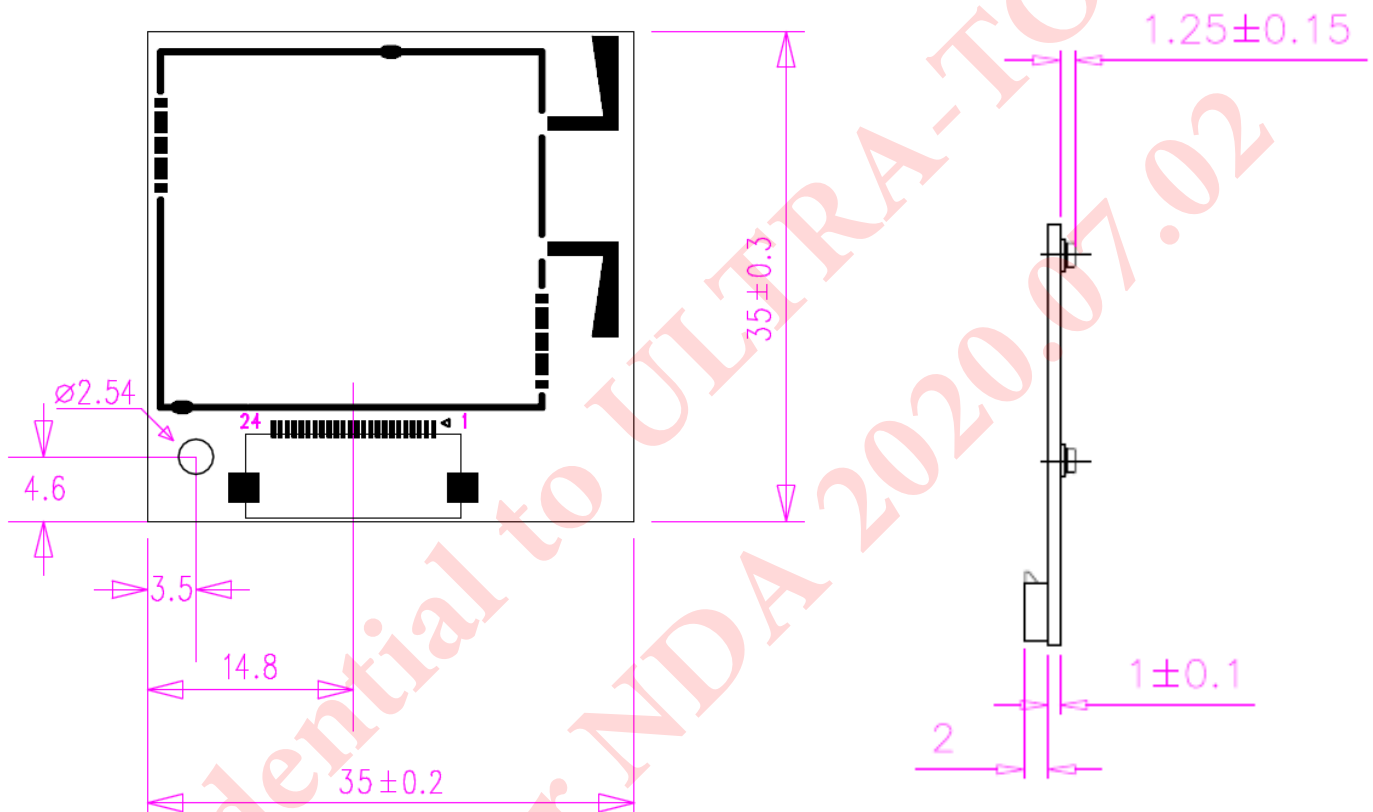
Mechanical Drawing of SY5-A24-F Module
